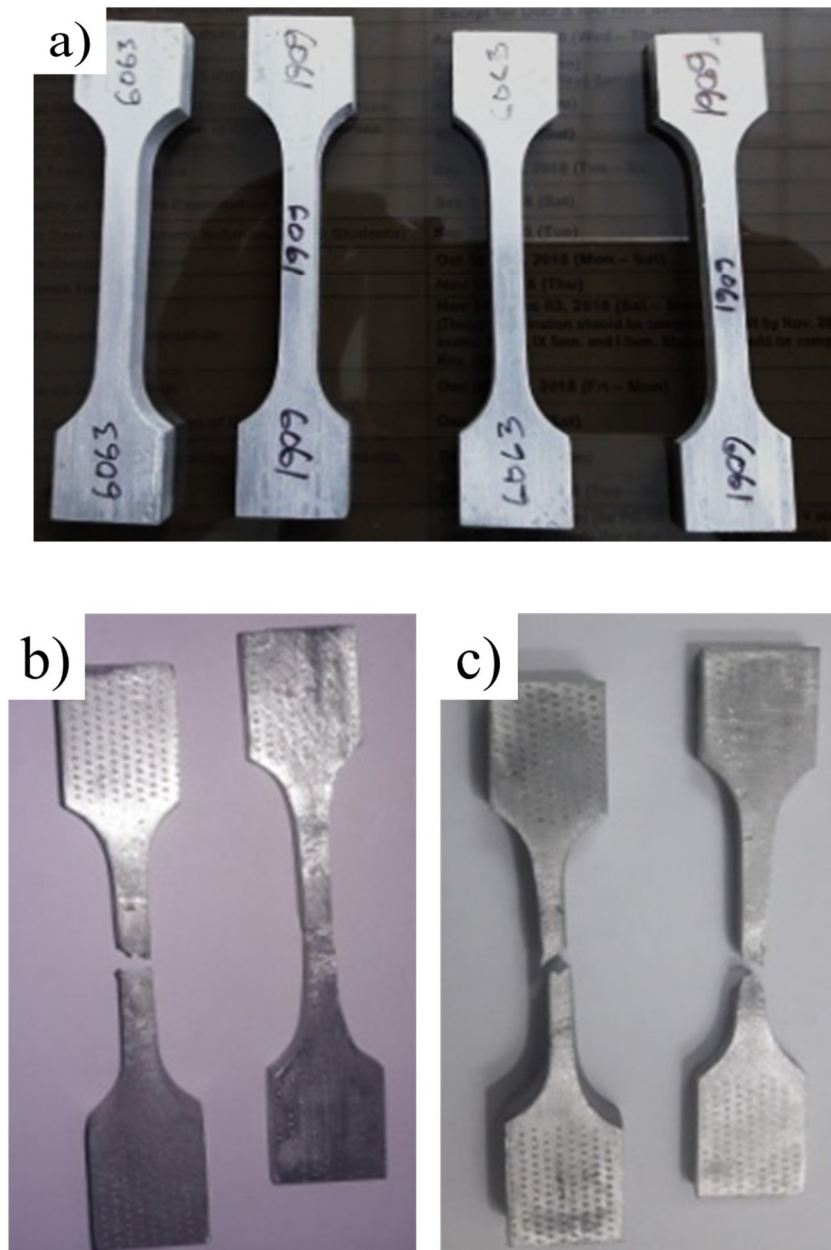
Tensile samples of MIG Joints a) Before testing, b) A6061 After testing and c) A6063 After testing
